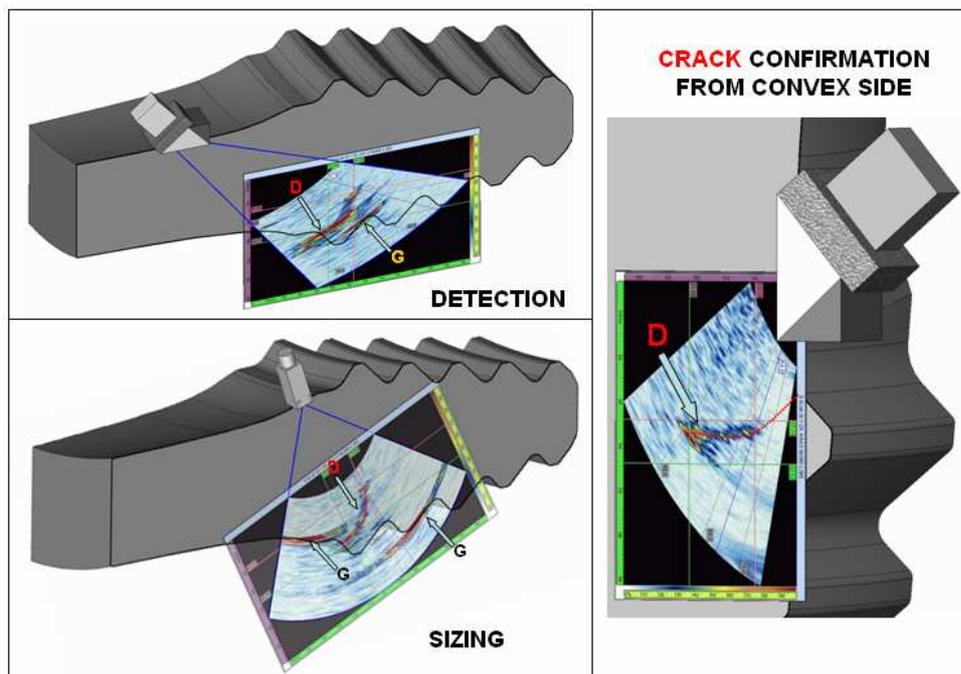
Example PAUT inspection features (probe, part, defect and S-scan) for crack detection and sizing in L-0 blade (GEC Alstom).
